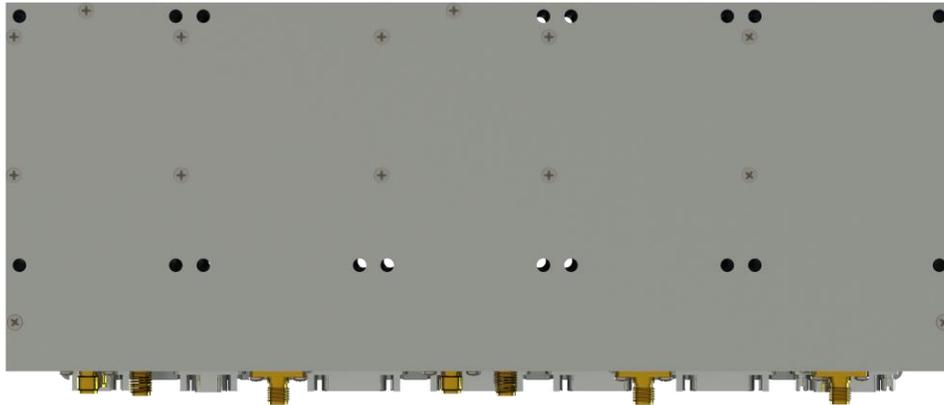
Mechanical Drawing – Top View (Dual-channel Connectors Shown)
